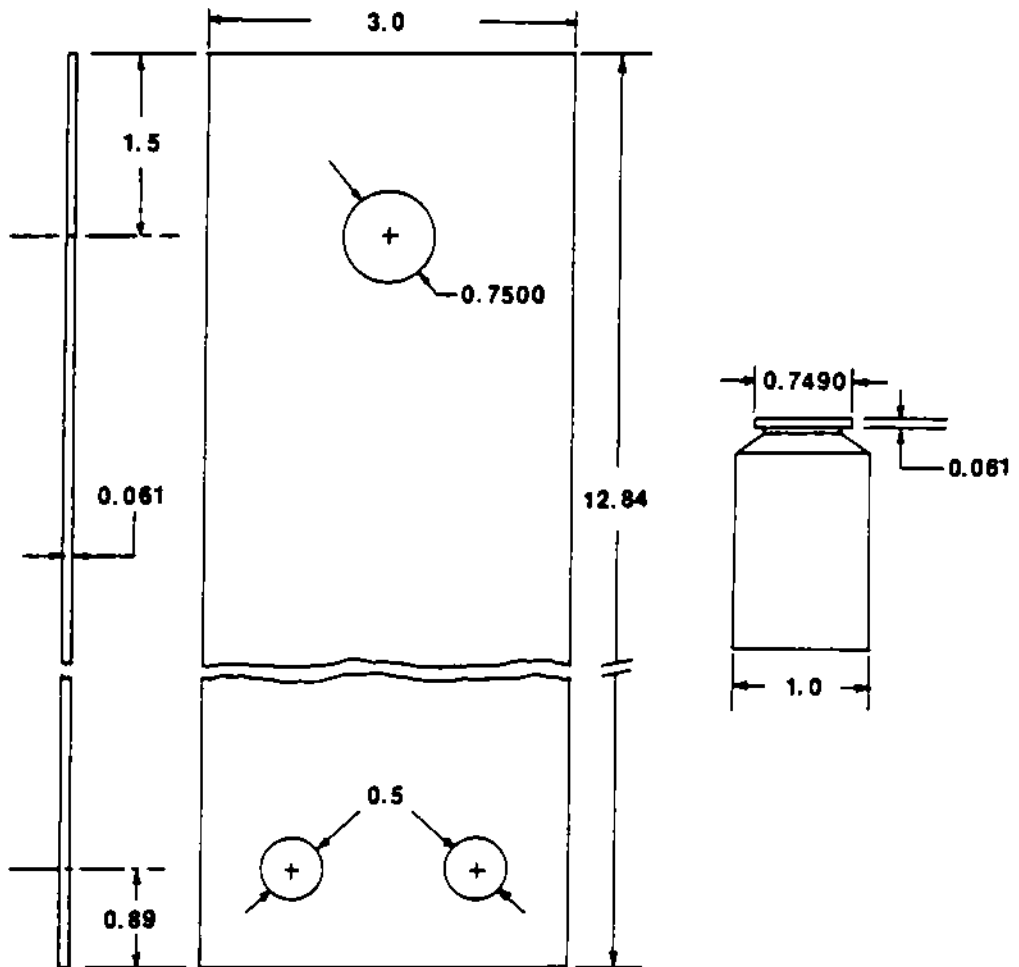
Geometry of a finite plate and a single pin specimen; specimen material is Aluminum 7075-T6. The pin is clearance fitted into the hole of the plate.
